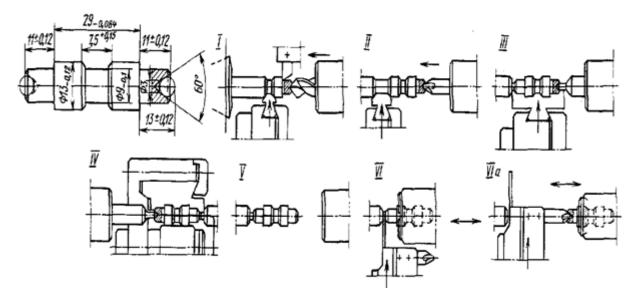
Scheme of machining roller on a six-spindle turning machine
